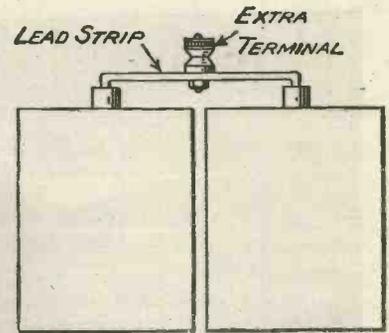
Method of tapping accumulators fitted with soldered lugs.
